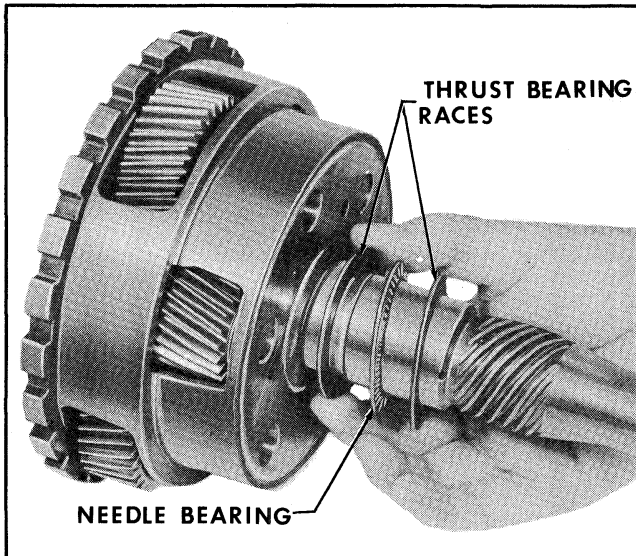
B-61 Removing Planet Carrier Thrust Bearing and Races
